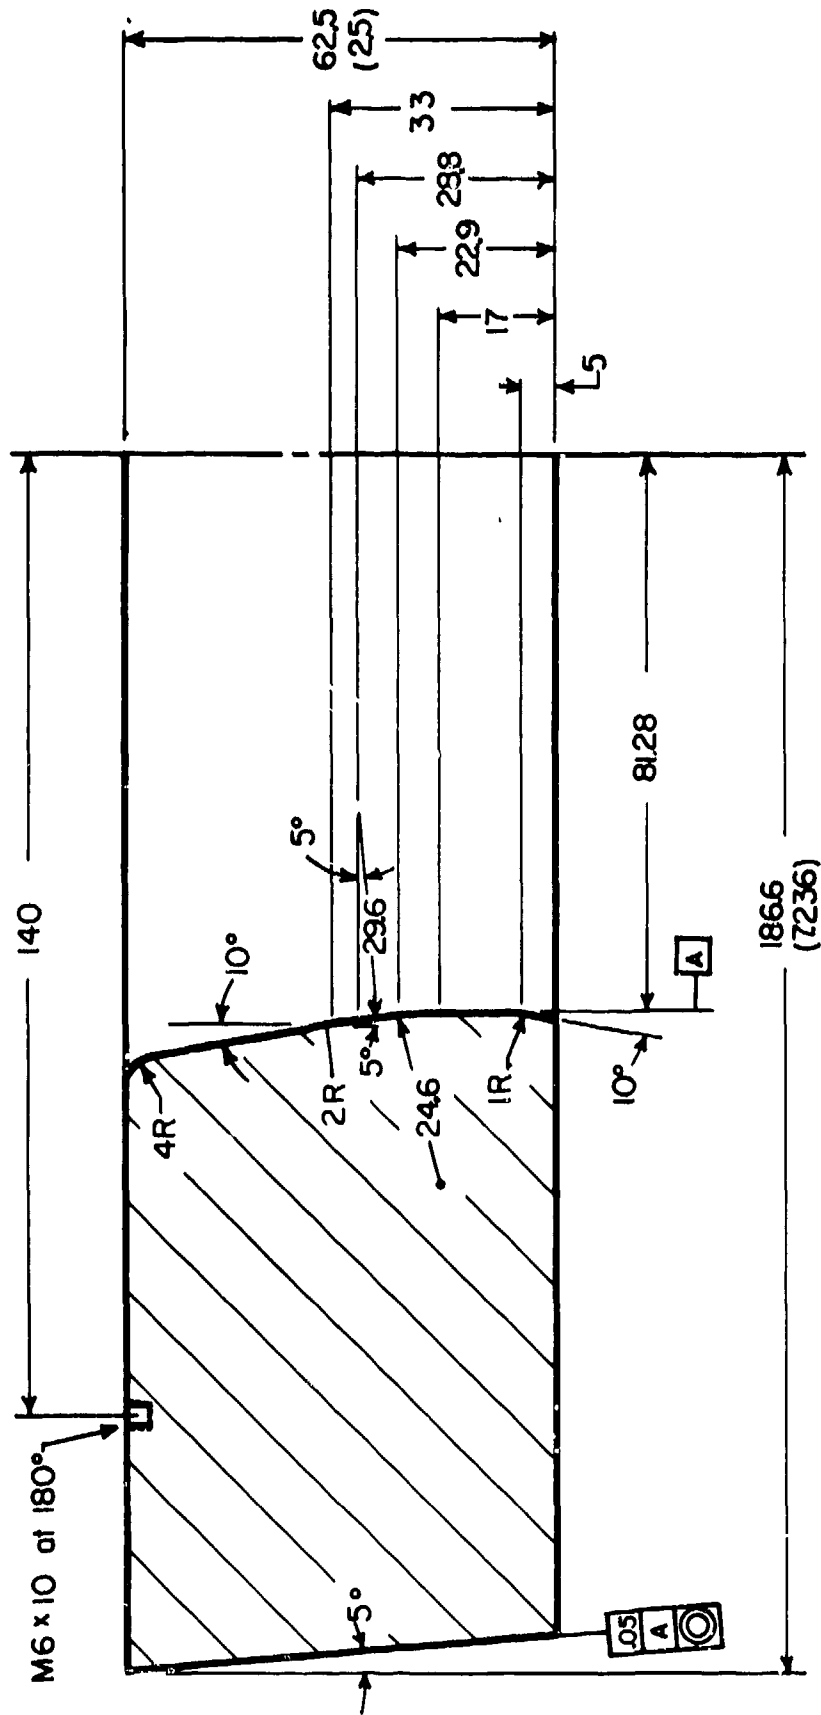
Double curvature die shape for hot drawing of M107 shell (final draw operation).
